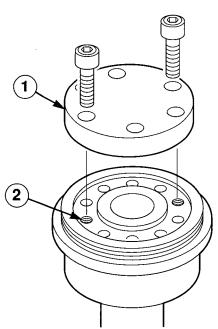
Attach pusher block to bearing block. (1) Pusher Block, (2) Tapped Hole.
